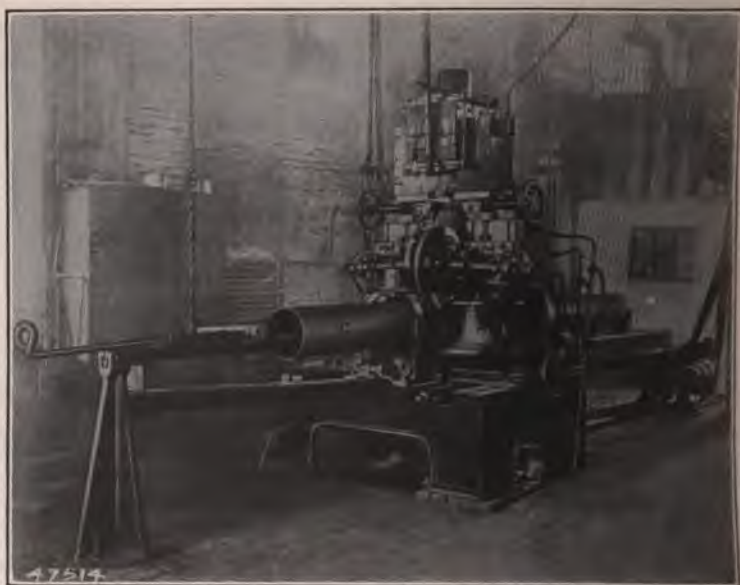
Manufacturing large pipe by continuous butt welding machine.
